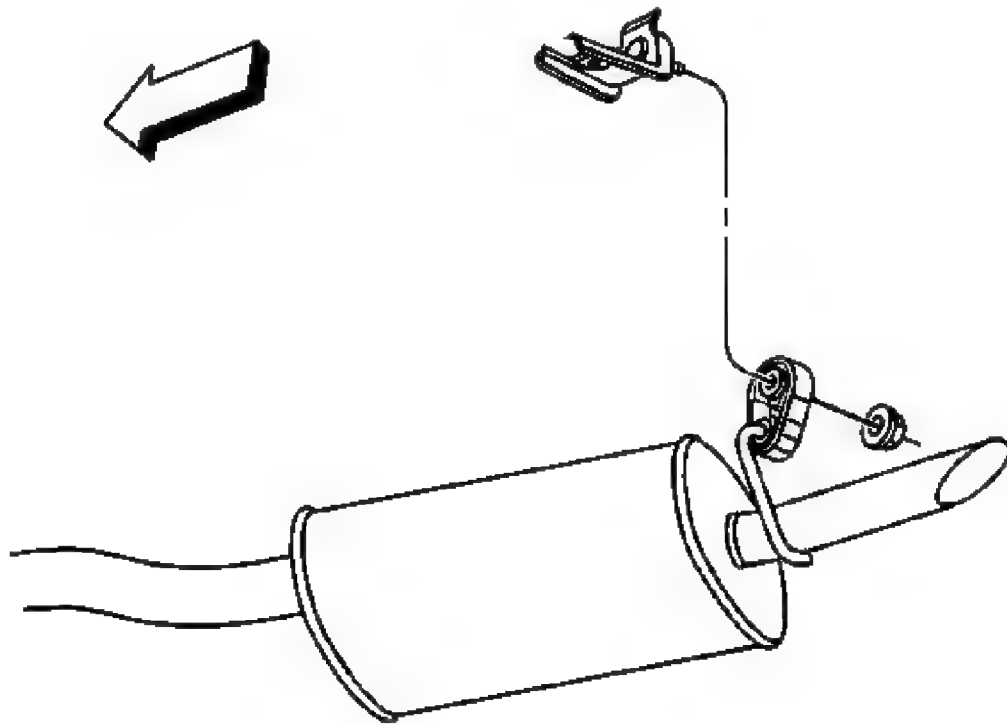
Removing/Installing Rear Exhaust Hanger (Single Muffler System)
